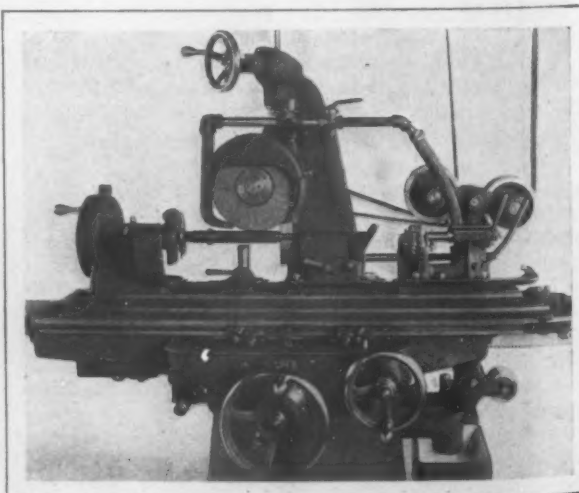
A Partial View of the Front of the Machine with the Water Guards Removed
